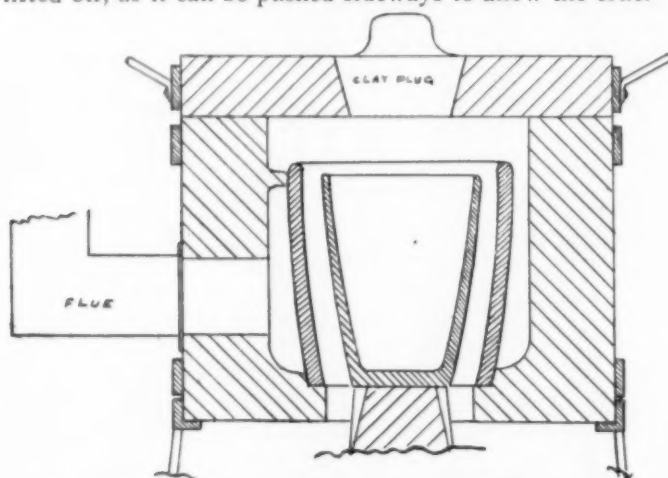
SECTIONAL VIEW OF GAS MELTING FURNACE. FLETCHER RUSSELL & COMPANY.
